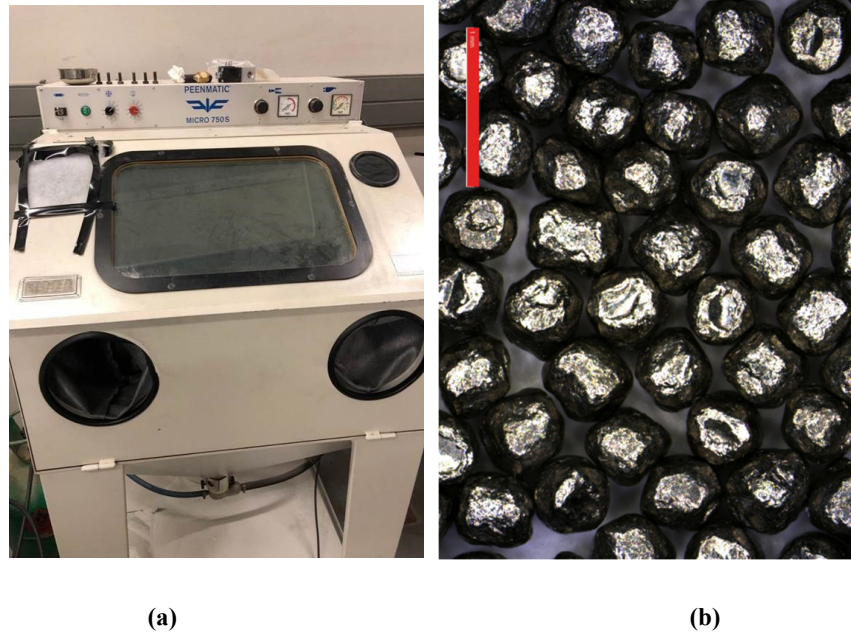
Blast cabinet (a) and stainless steel beads (b) used for shot peening.
